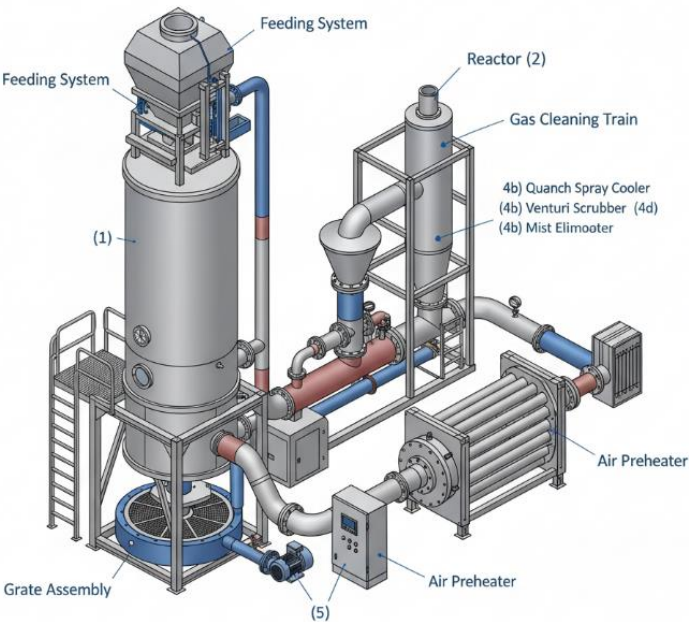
Engineering drawing (isometric view) of the fabricated plant system
